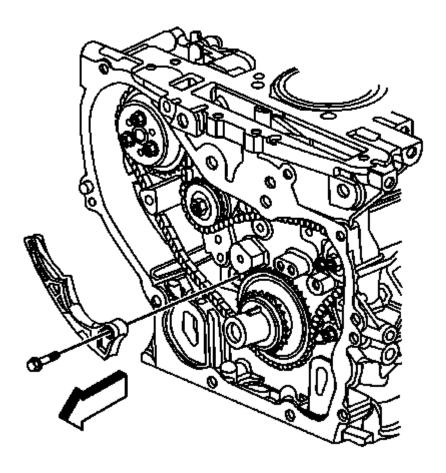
Small Balance Shaft Drive Chain Guide Courtesy of GENERAL MOTORS COMPANY
